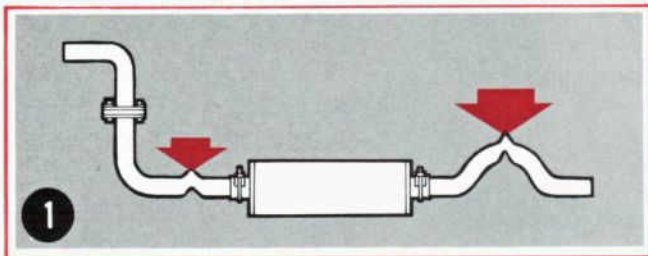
Kinks in any one of the exhaust pipes create back pressure in the exhaust system and can lead to engine damage. Check to make certain the tail pipe is not folded over or collapsed at the end. Damage here may have also caused the pipes to kink and bend severely farther forward since whatever struck or caused the pipe to crush may also have transferred the force up front. See (2).
